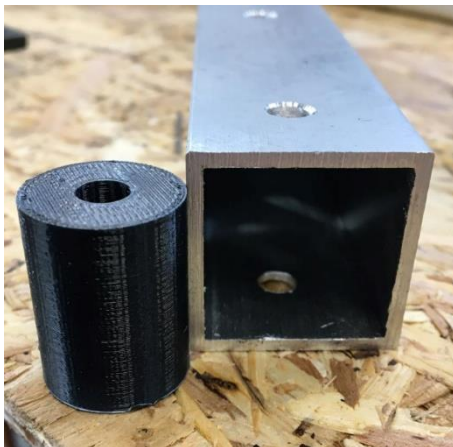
Crush preventer to be fitted inside 30 x 30 mm box section
